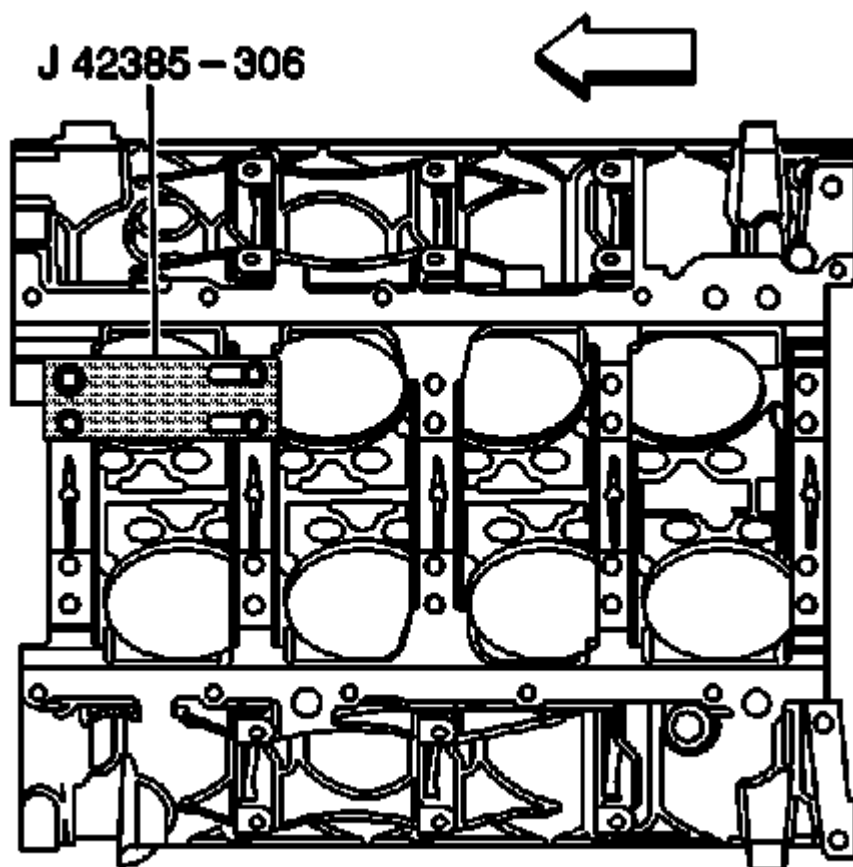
View Of Fixture Plate, Bolt & Bushing
